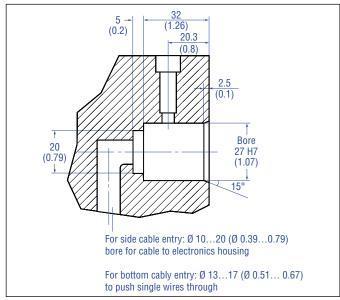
Example of mounting detail: Shoulder screw 8-M6 (ISO 7379) with internal hexagon
